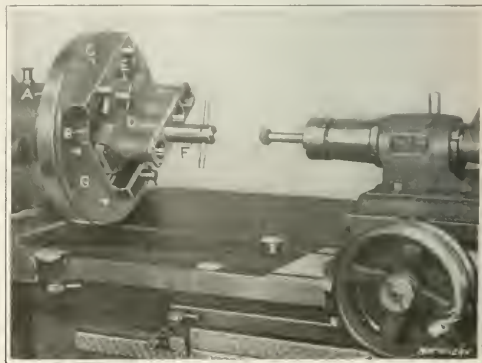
Fixture for holding a Four-hole Air Pump Cylinder
